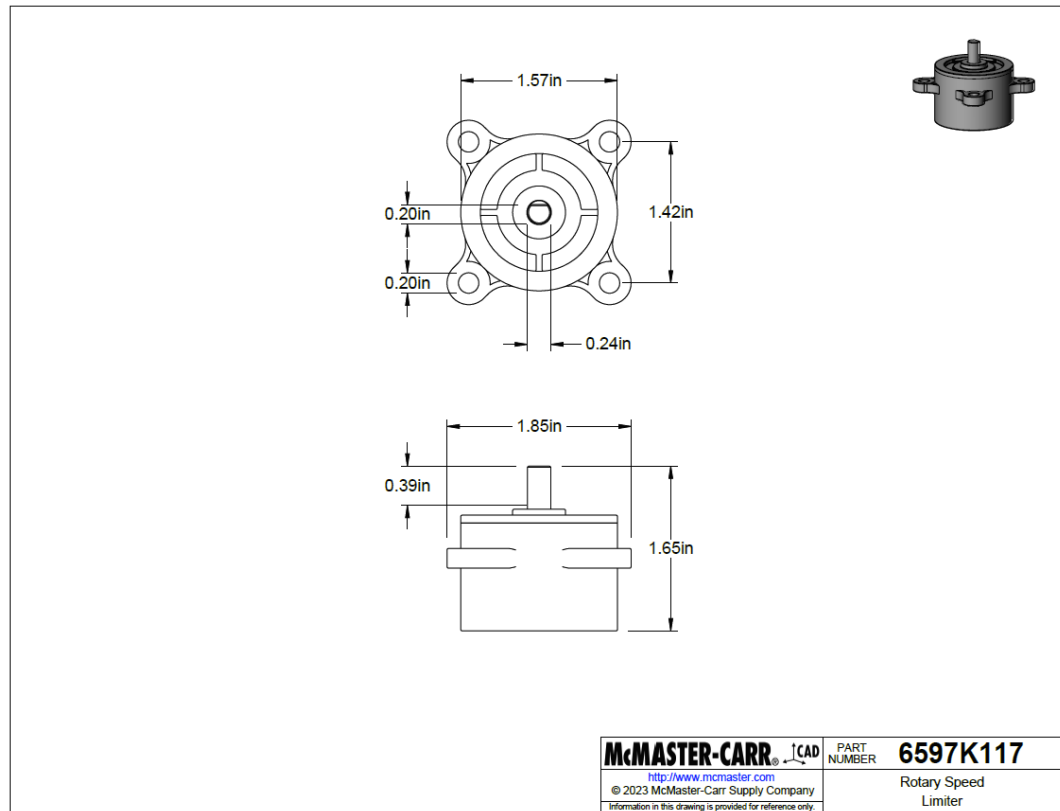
CAD drawing of purchased 6597K117 damper from McMaster-Carr
